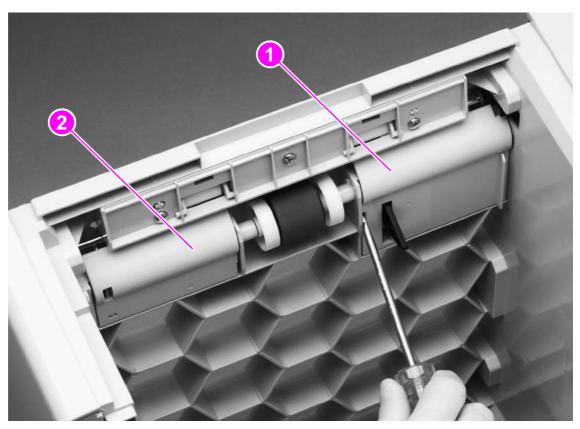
Removing the 500-sheet feeder pickup roller (1 of 2)
